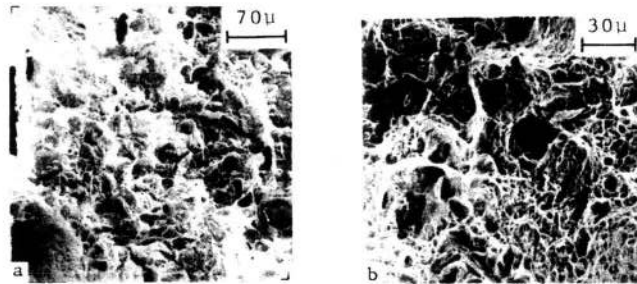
Rupture dimples on the fracture surfaces for, (a) 870+Q and (b) 870+200 heat treatment conditions.
